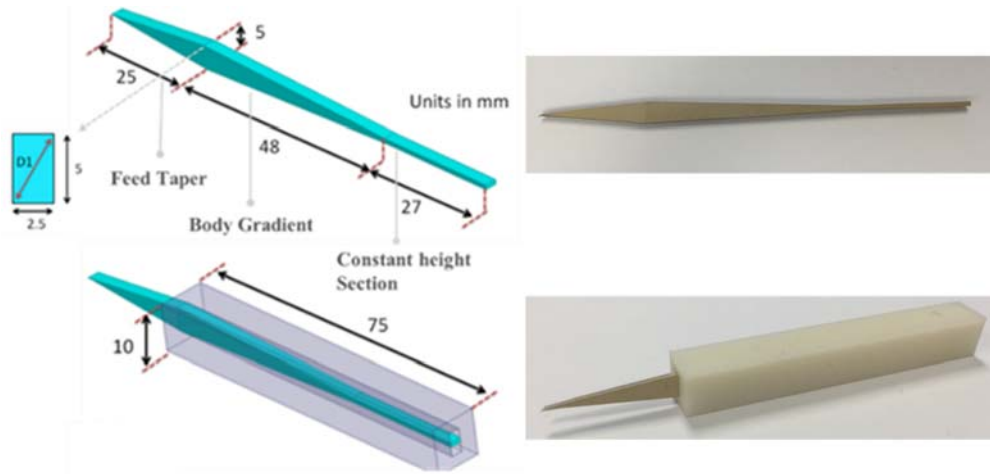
Proposed multilayer DRA geometry and key dimensions, showing the inner core (top) and multilayer design (bottom).
